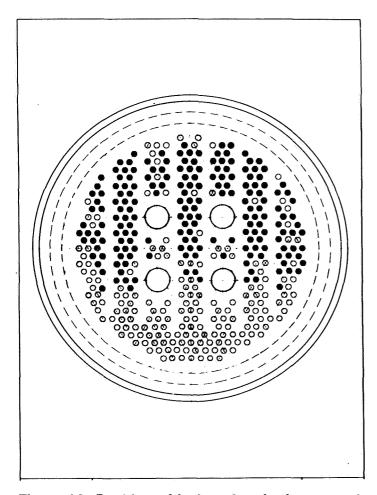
Position of leaky tubes in the gas outlet tube sheet of the ammonia plant waste-heat boiler (first design).
